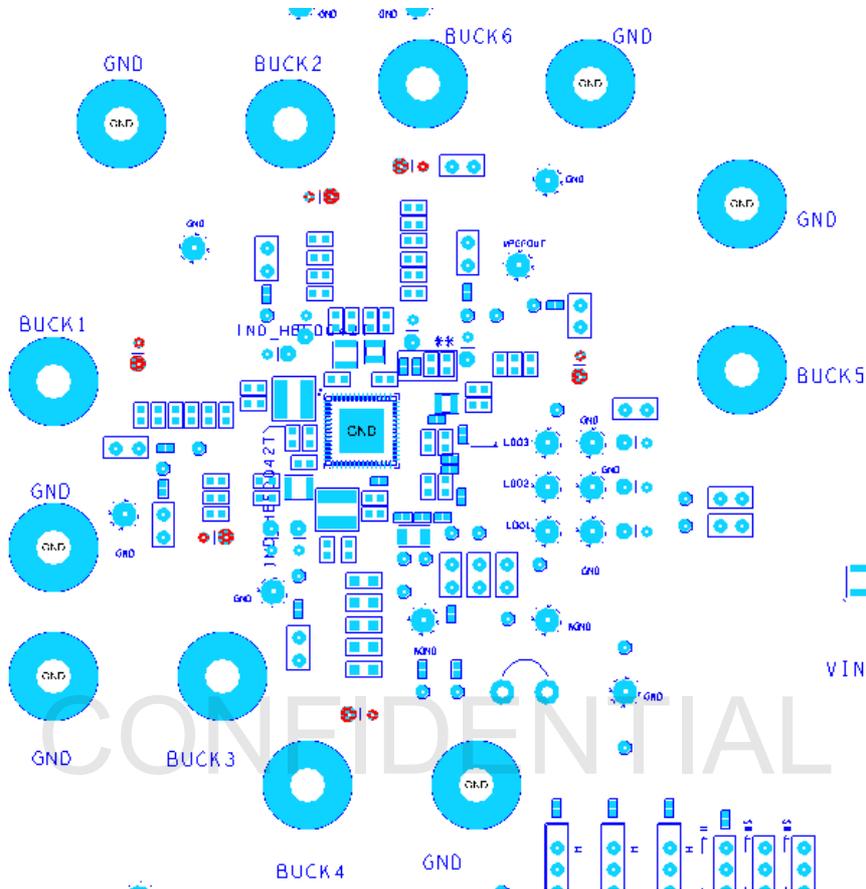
Locations for Measurement of Buck Regulator Output Voltages
